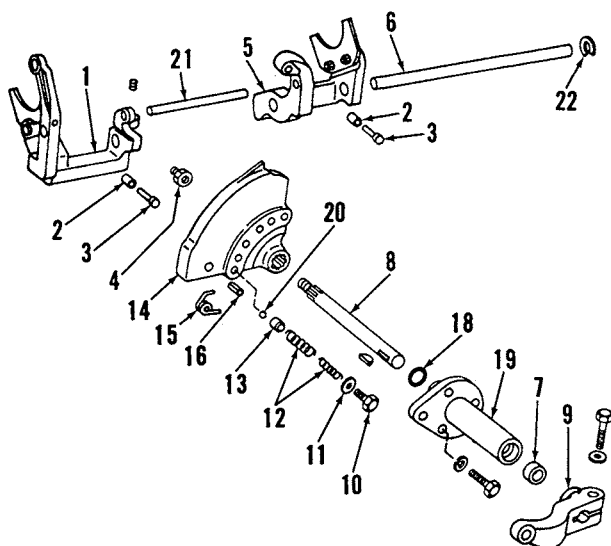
A—Exploded view of speed change shifter components used on 4650 models with Quad-Range transmission. Refer to Fig. 123 for legend except for shift rail (21) and snap ring (22).
